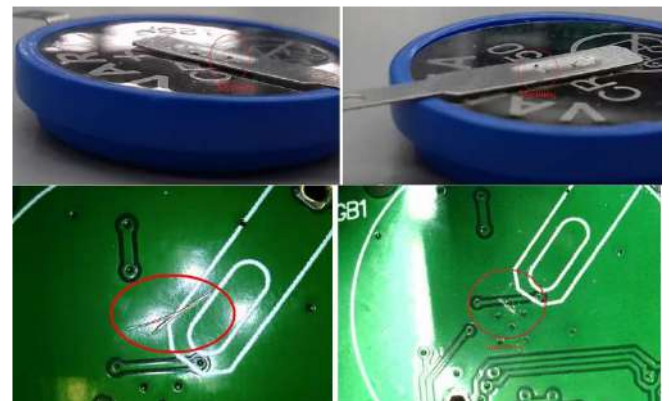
Physical damage to the solder mask layer of the PCB by metal scraps
